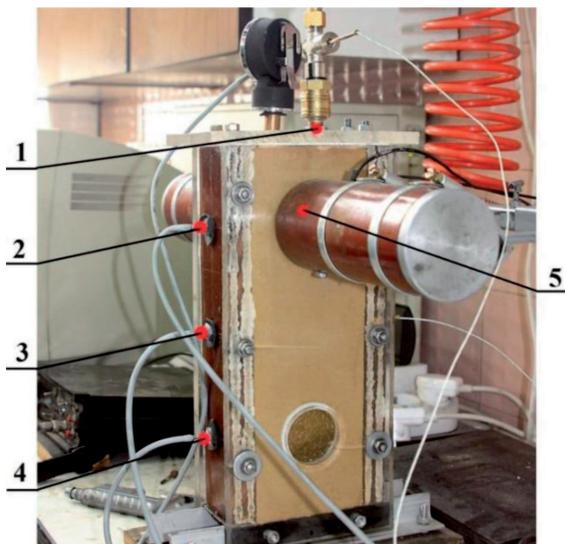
Stand for testing gas pressure changes in the core box (view of the core box); 1 – place of a gas introduction into the core box; 2,3,4 – pressure sensor, measuring point 1,2,3; 5 – ultrasound head [10]
